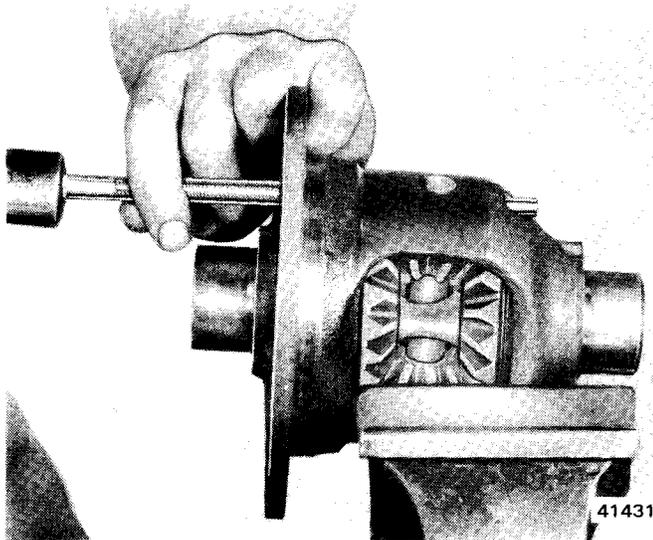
Removing Pinion Mate Shaft Lockpin
